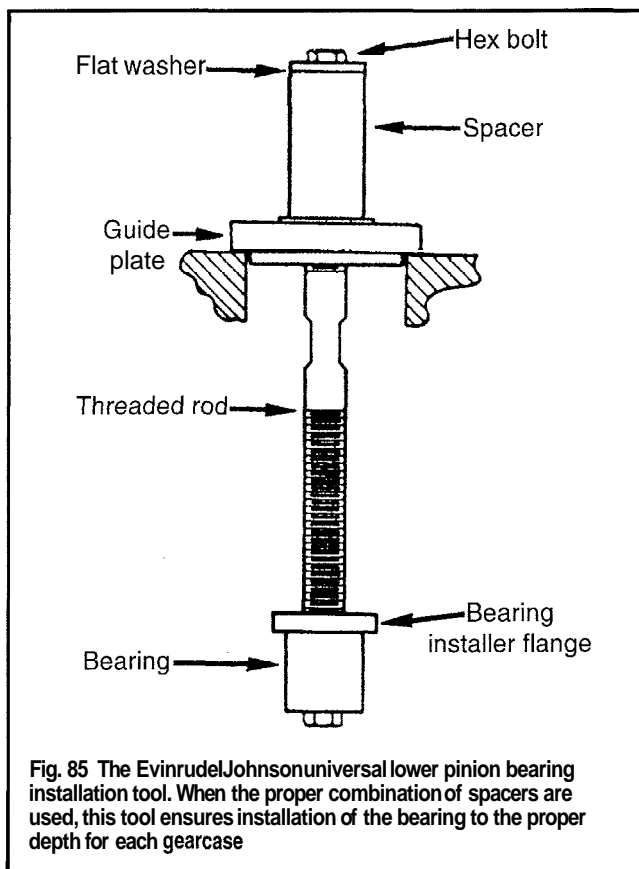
The EvinrudeJohnson universal lower pinion bearing installation tool. When the proper combination of spacers are used, this tool ensures installation of the bearing to the proper depth for each gearcase
